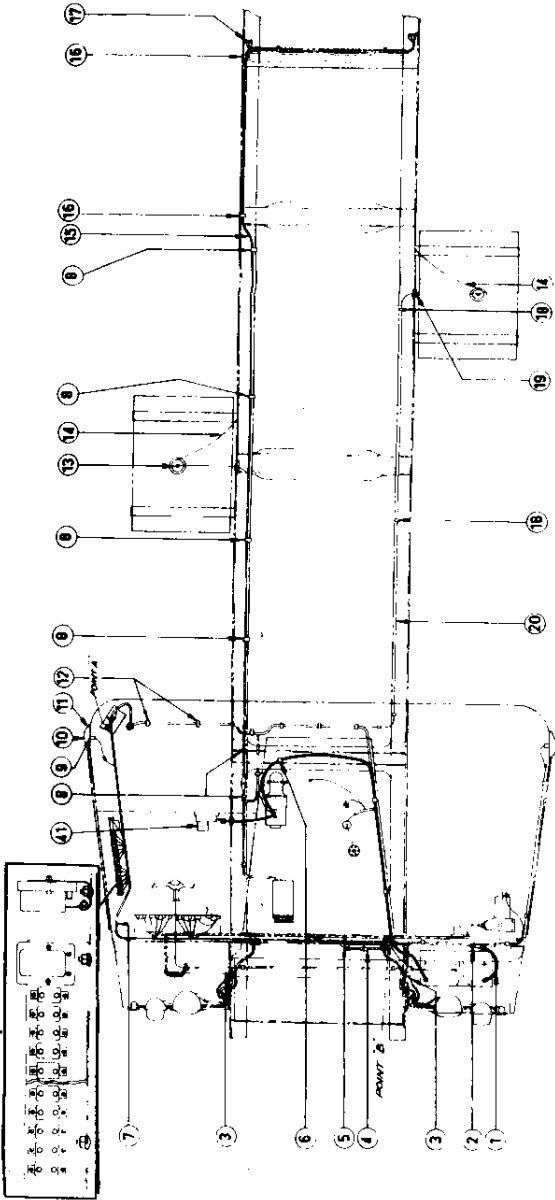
WIRING LAYOUT DIAGRAM (PLAN VIEW)
